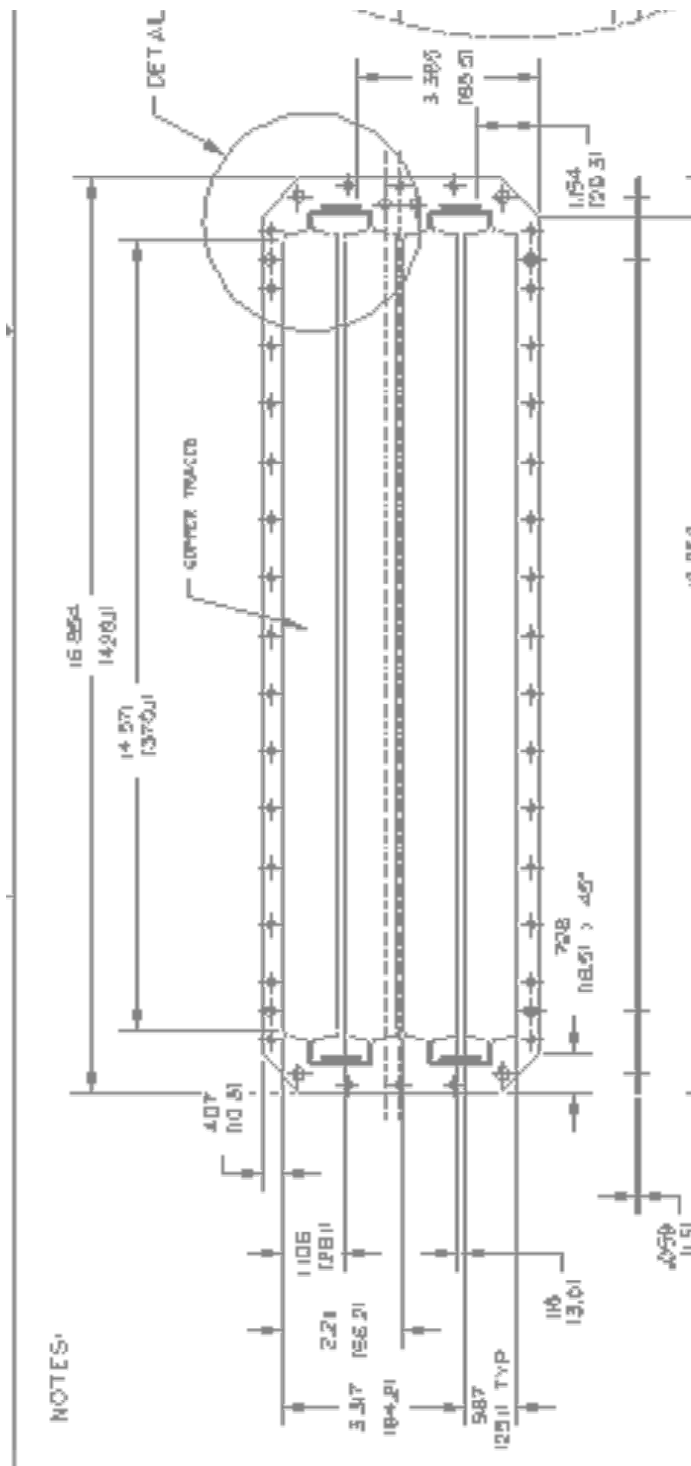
PCB drawing for the TOF.W MRPC showing the strip configuration and the connector footprints. A copy of this drawing is located at: <https://www.phenix.bnl.gov/WWW/p/draft/julia/TOFWest/CDR/support/PCB.pdf>
